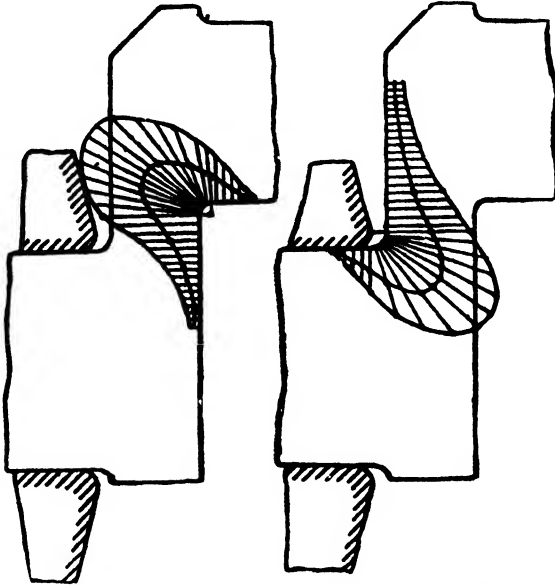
STRESSES IN CRANKSHAFT FILLETS ·
